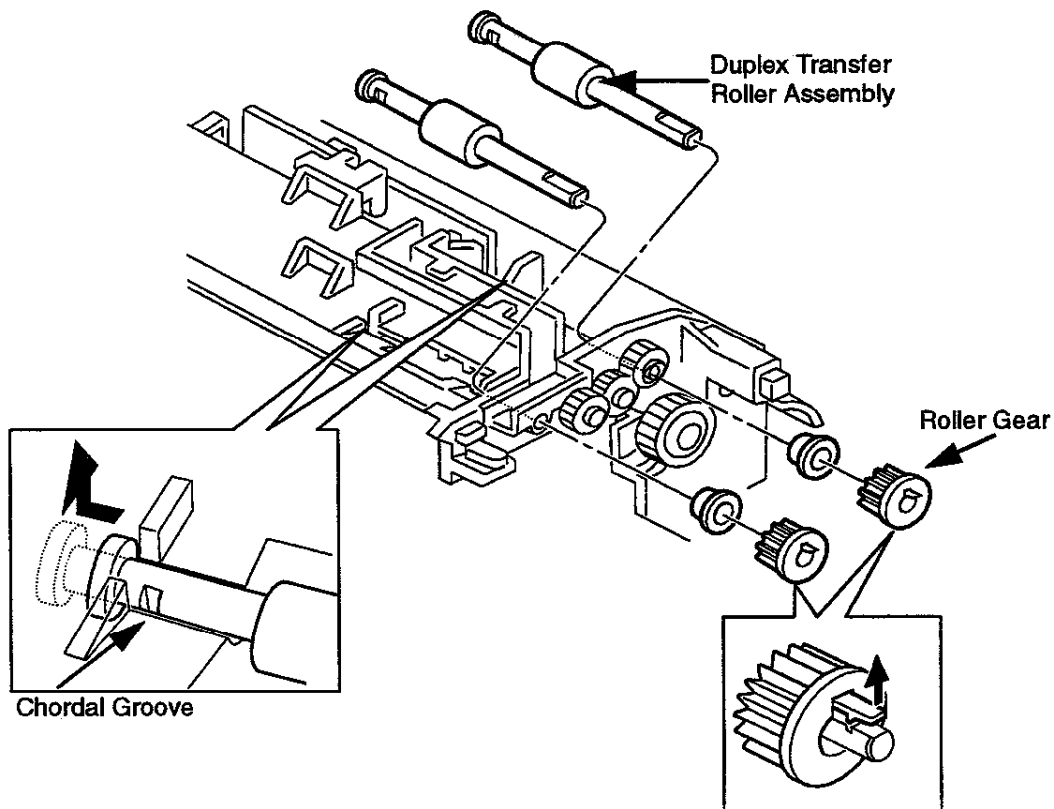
Duplex Transfer Roller Assembly
